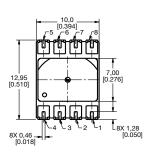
SMT PACKAGE DIMENSIONAL DRAWINGS (CONTINUED)
